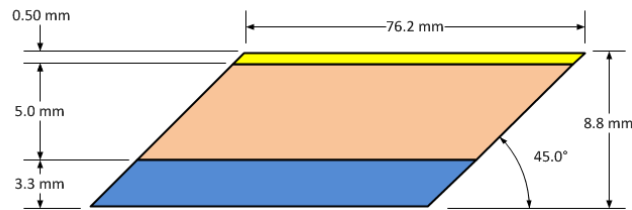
Final biplate dimensions - Side view (not drawn to scale).
